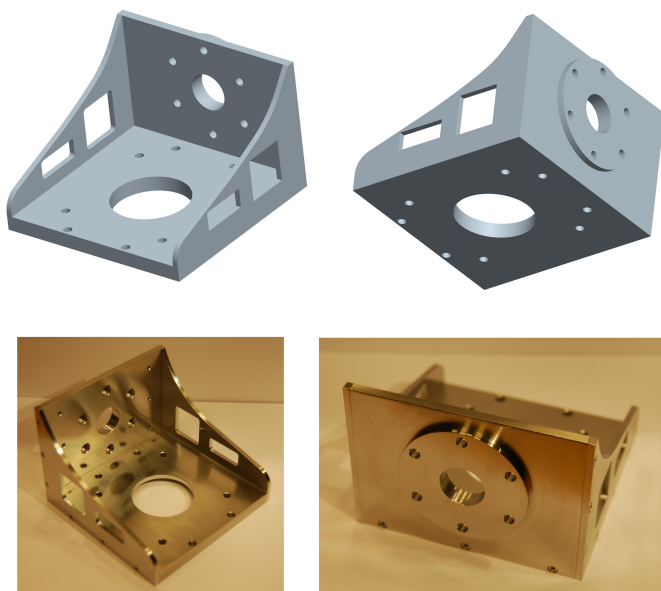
Top: Sketches of the *sample attachment unit* from different view directions; bottom: photographs of the *sample attachment unit*.
